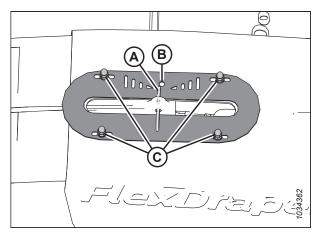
Wing Movement Indicator on Top of Flex Linkage Cover – Left Side Shown
